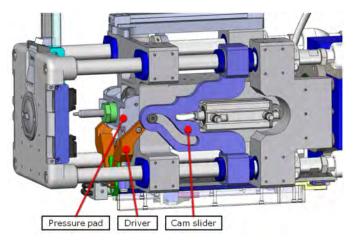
Pressure pad, driver, and cam slider (Driver in "feed" position)
